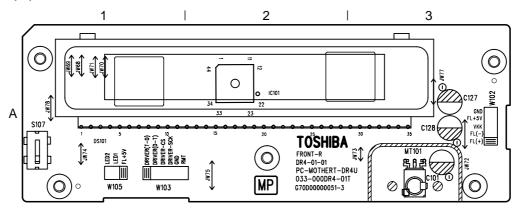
EU03A Front (R) PC Broad (Top side)
